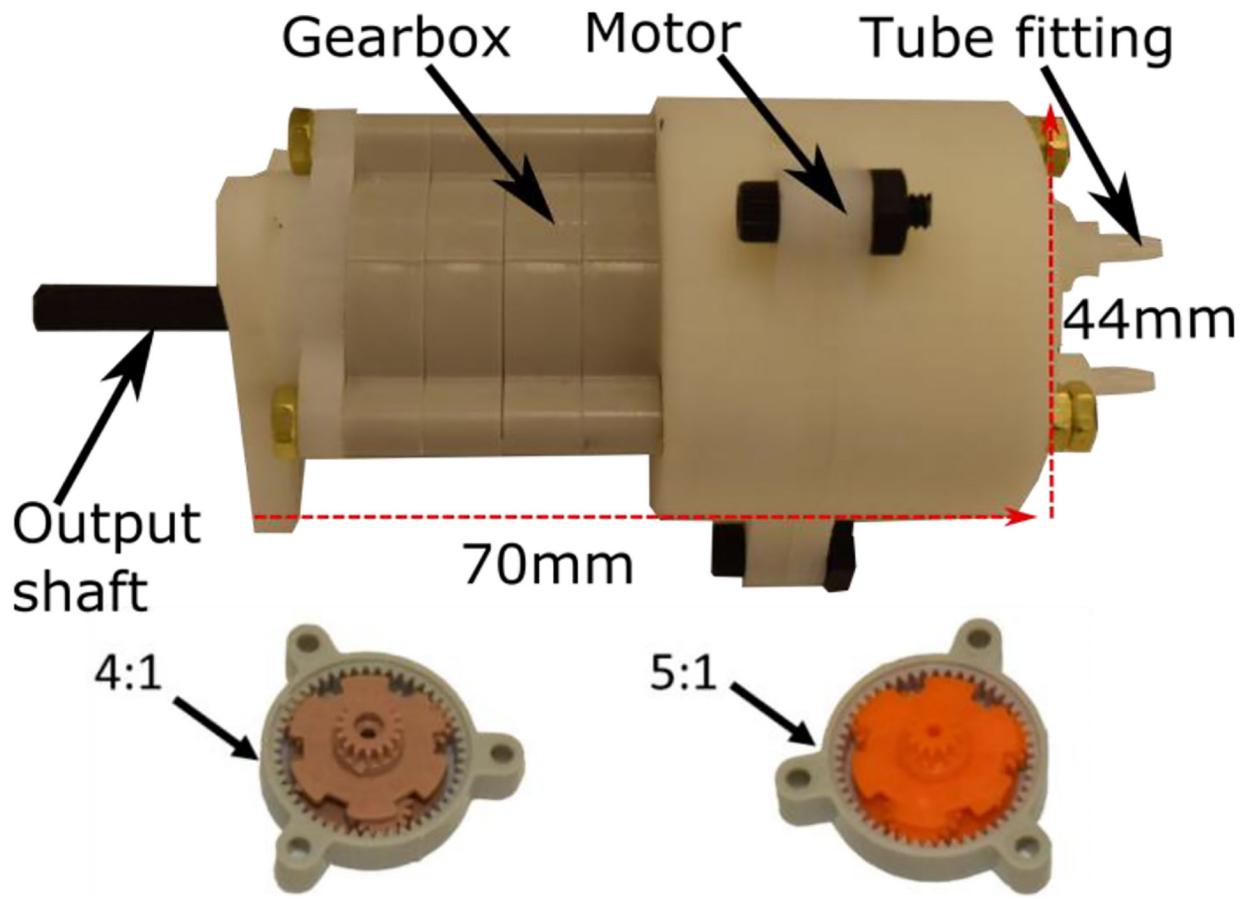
Assembly of the proposed pneumatic motor coupled with a gearbox. The modular gear stages shown at the bottom are available in 4:1 and 5:1 gear ratios.
